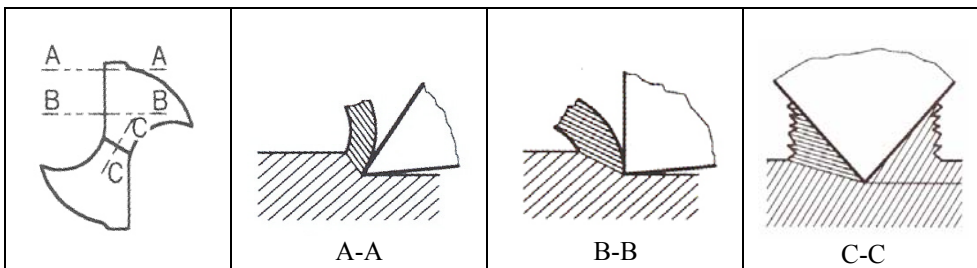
Interaction the workpiece-the twist drill on the local zones of tool
